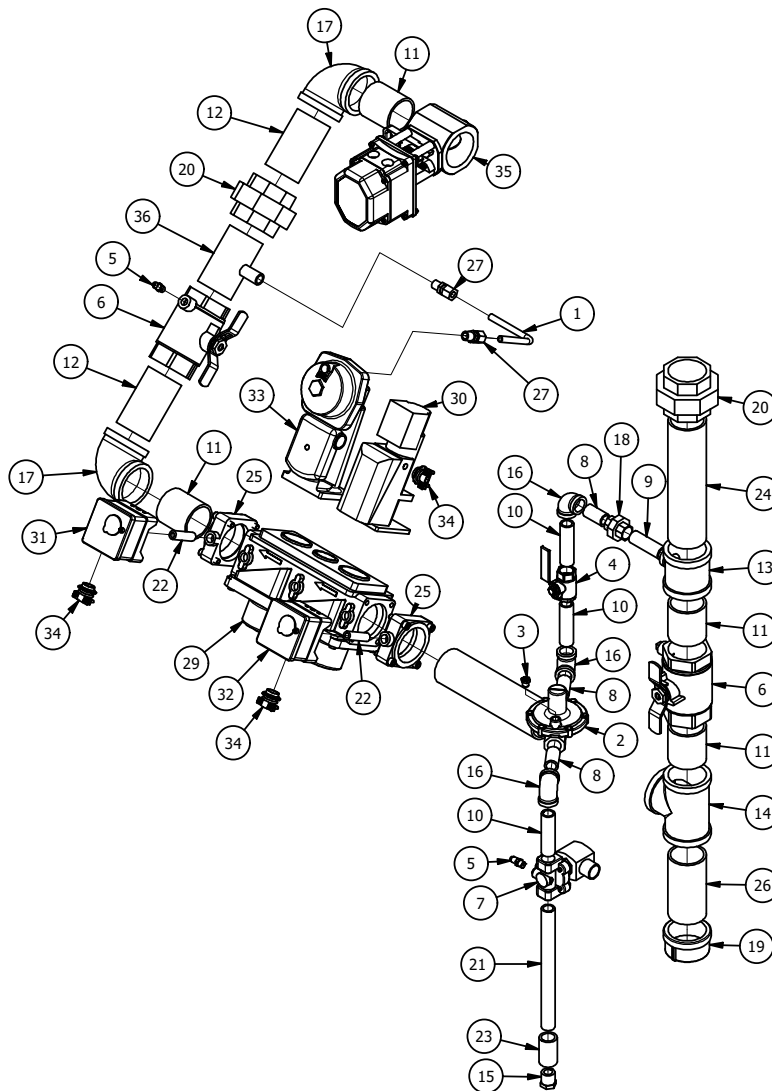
GAS TRAIN (EXE-4000-6000)
